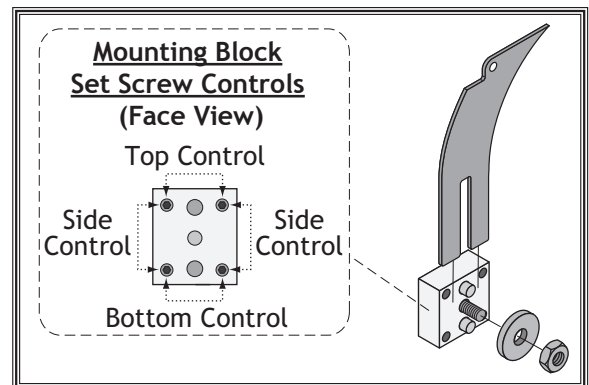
shows the set screws associated with controlling the mounting block position. Have patience when adjusting the mounting block, because it requires trial-and-error to perform with accuracy.
